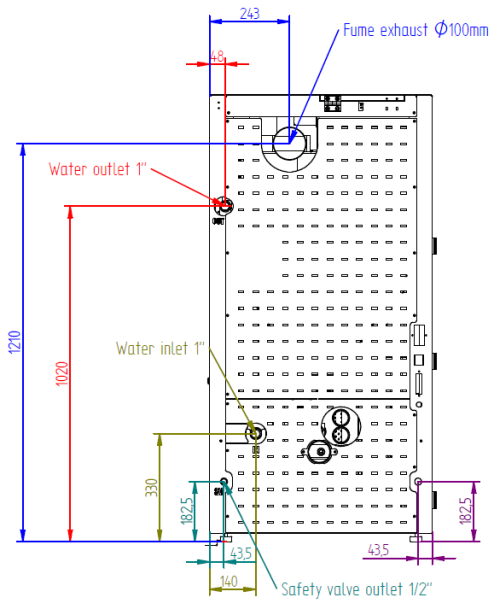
Hydraulic connections of the automatic pellet-run boiler.
